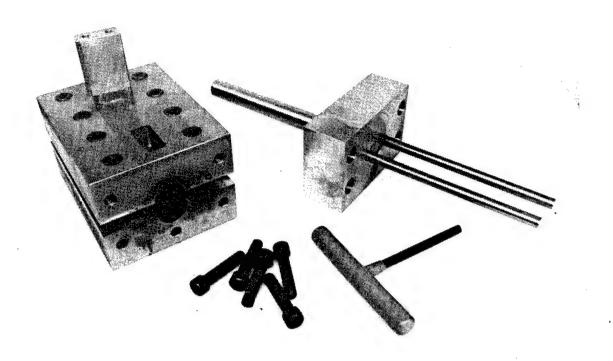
Component Parts of Pin-end Crimp-forming Tool
